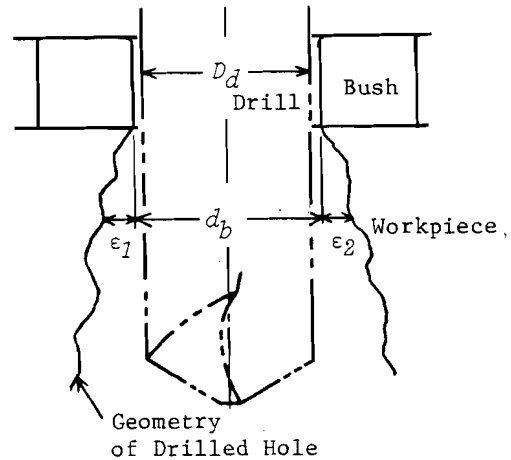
Definition of dimensional error ϵ_T in drilling experiment
